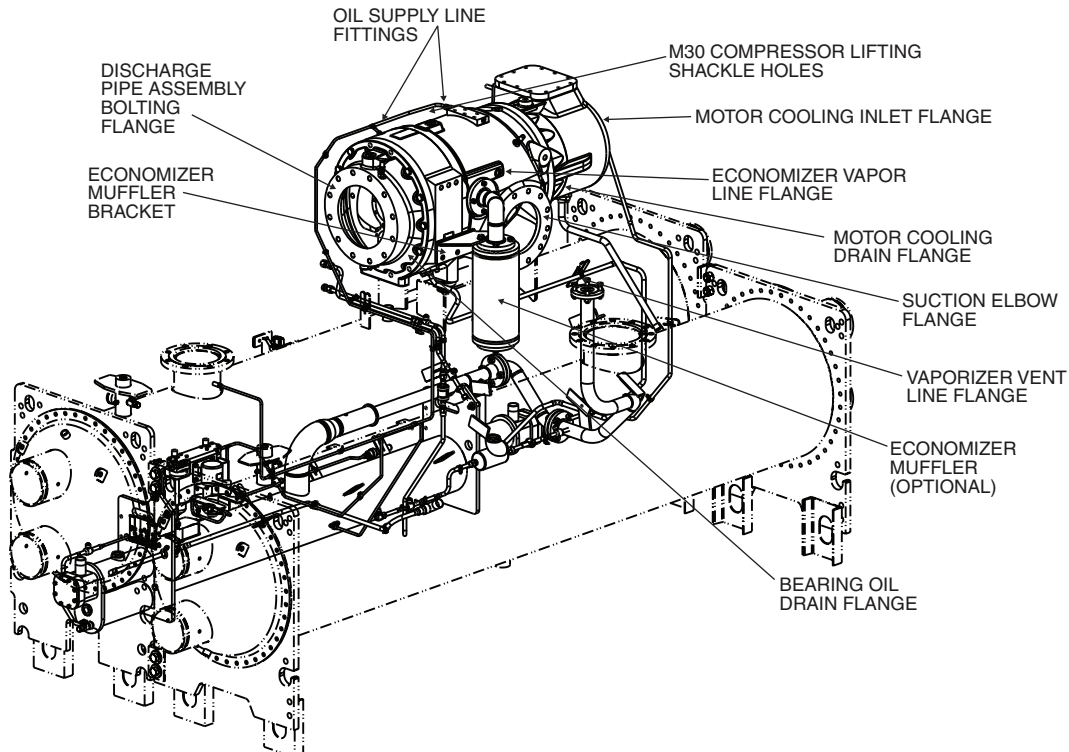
Compressor Removal, Q and R Compressors (Unit with R Compressor Shown)
